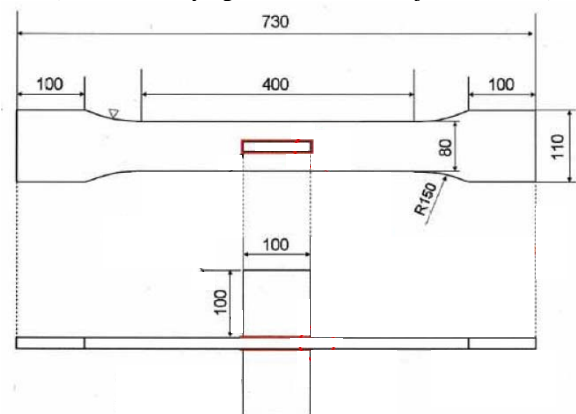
Fatigue test piece (boxing fillet welded joint)
